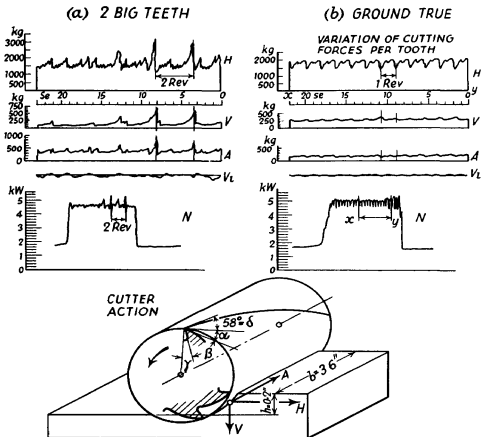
FORCES ACTING AT THE TOOTH OF THE MILLING CUTTER
